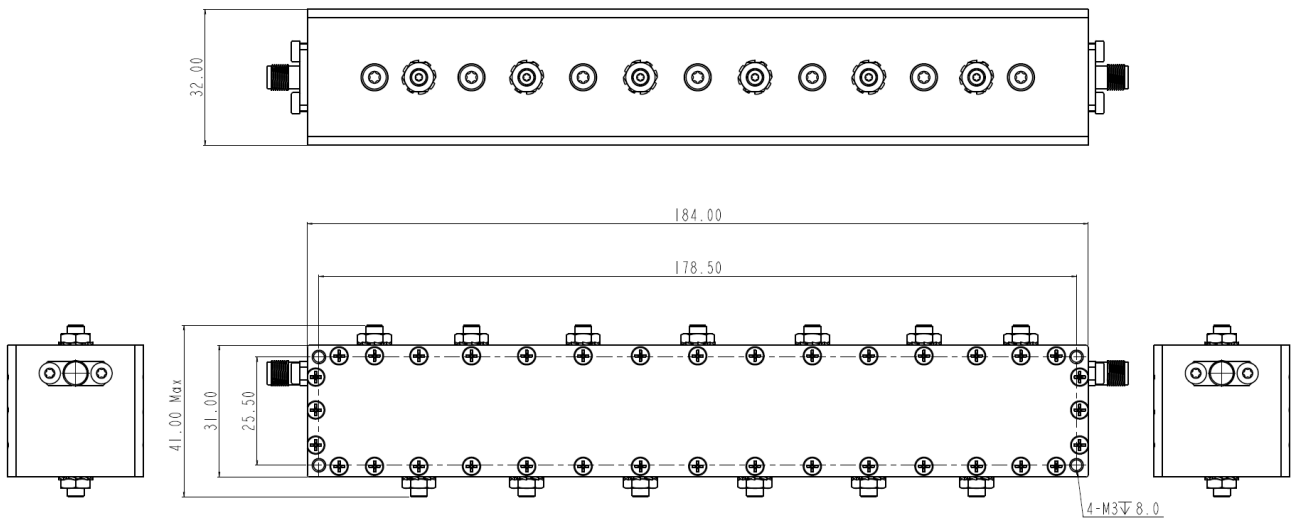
JX-CF1-1300M2600M-40S front panel layout
